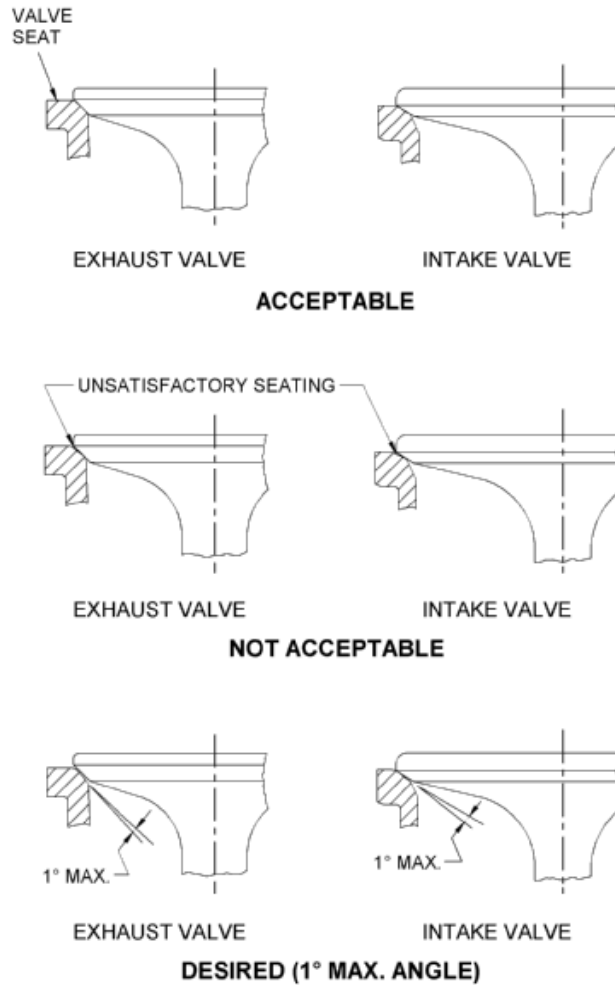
• Valve to Seat Fit Acceptable Criteria
